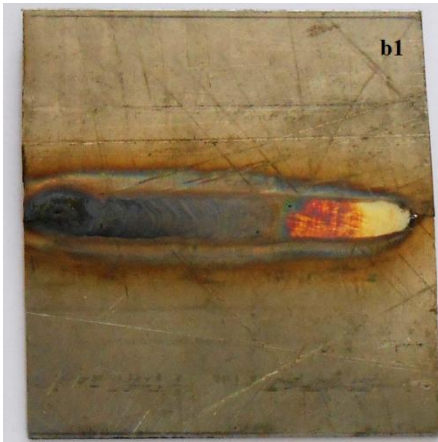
Weld bead shape of sample at face and root, welded at 1mm/s with low heat input
